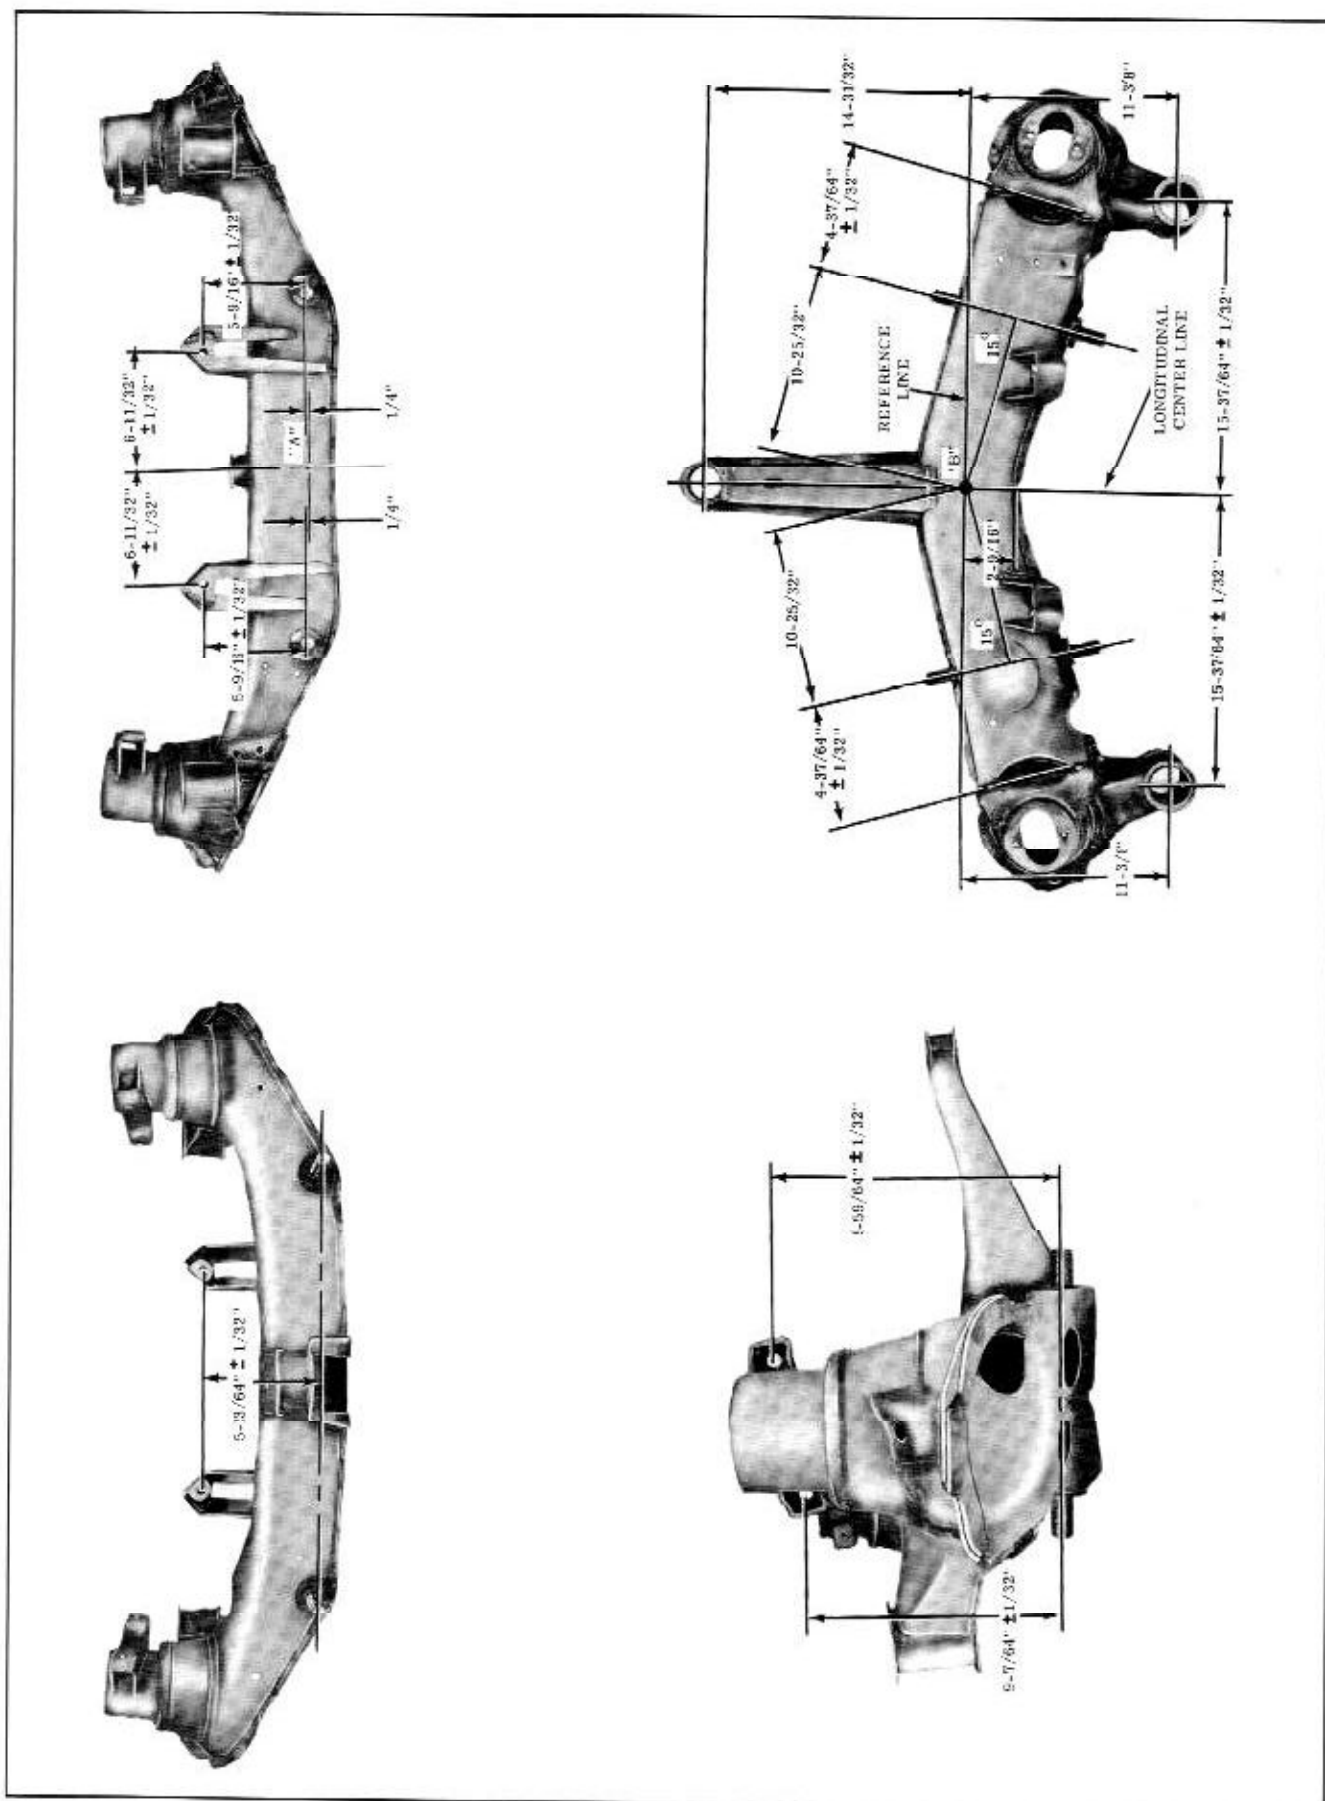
Front Suspension Cross Bar Alignment Dimensions
